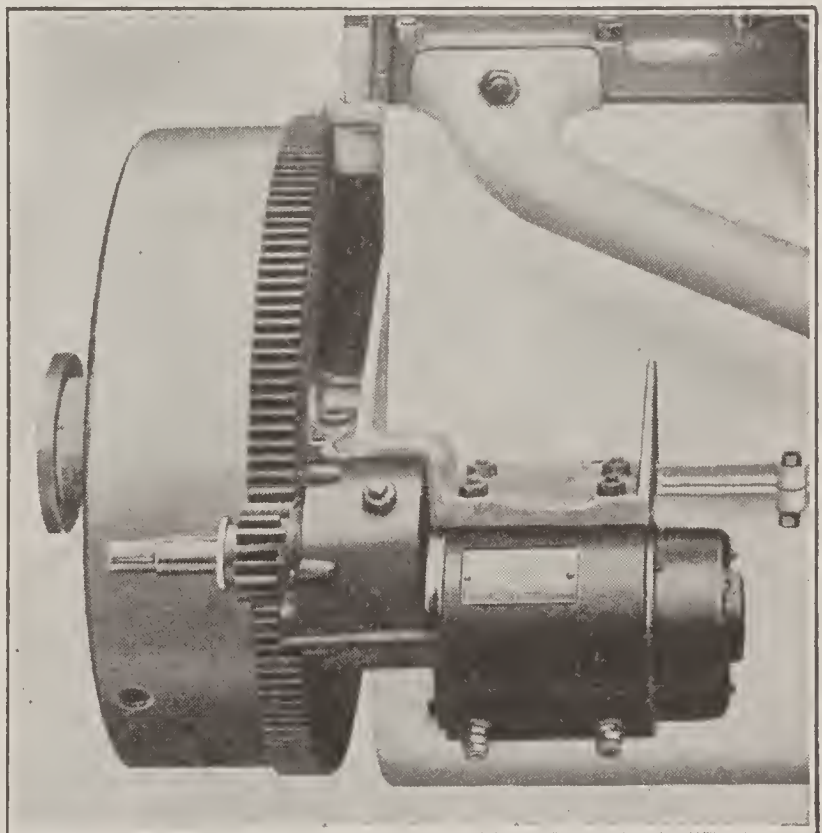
Double-Reducing Gear Type Installation, Wagner Starting Motor
